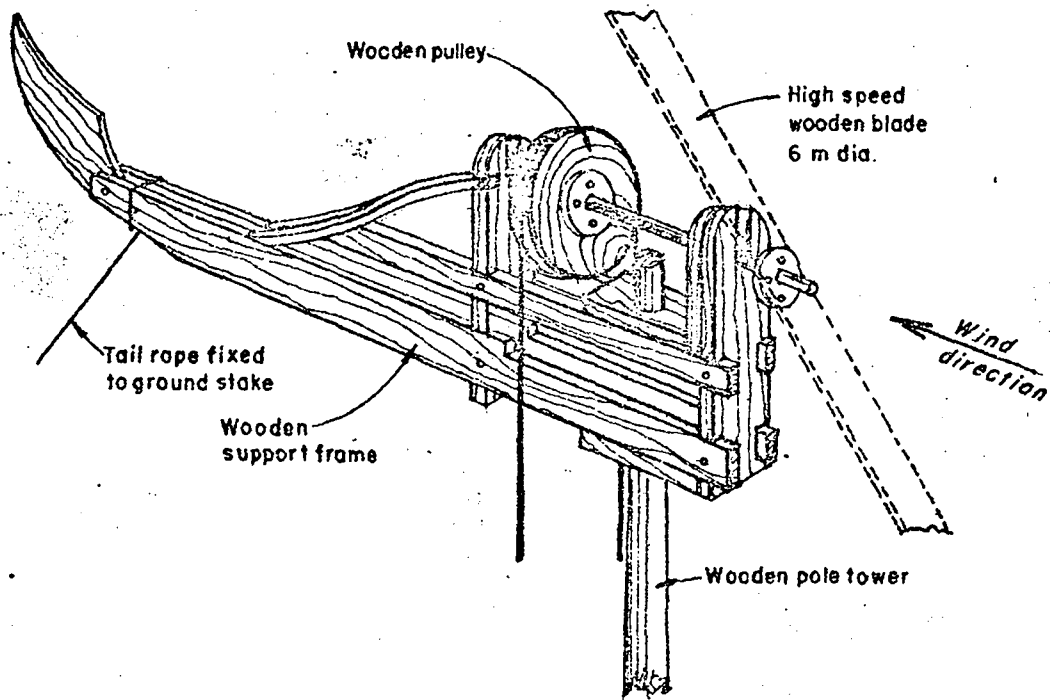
Thai highspeed rotor wind powered water pump wooden mounting assembly
